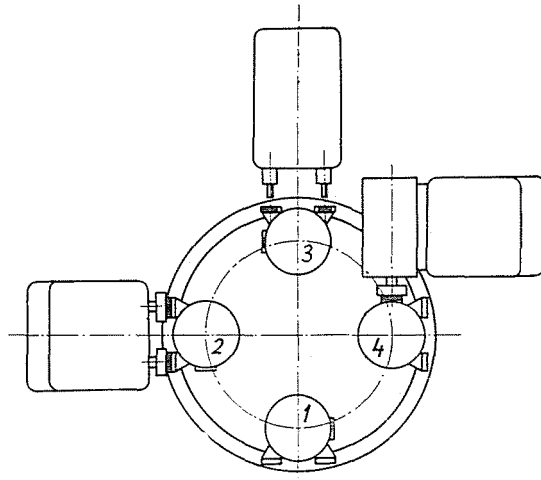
Arrangement diagram of Type CD 4 Single-Purpose Machine
